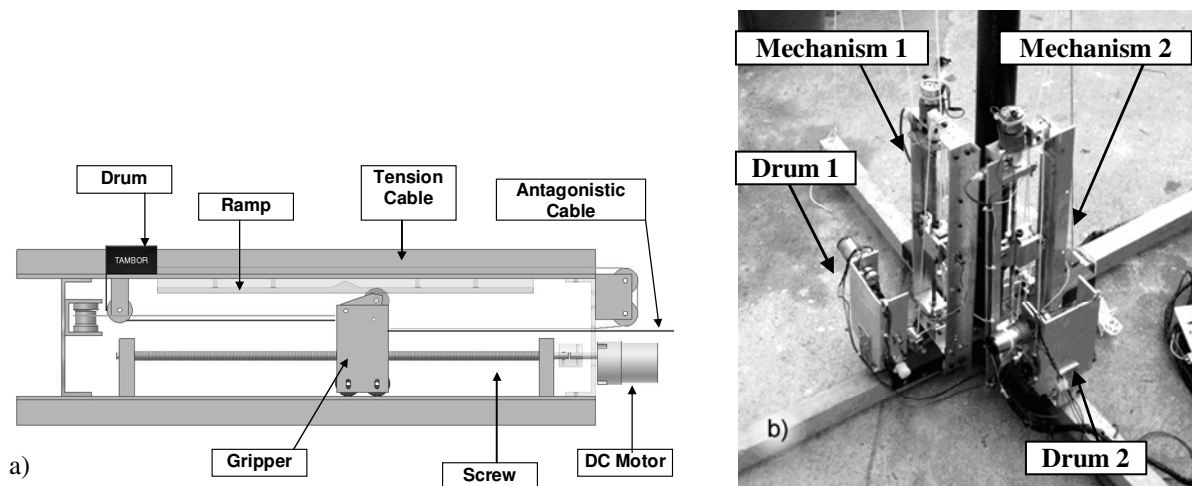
Auxiliary mechanism a) Main parts b) Orthogonal assemblage
